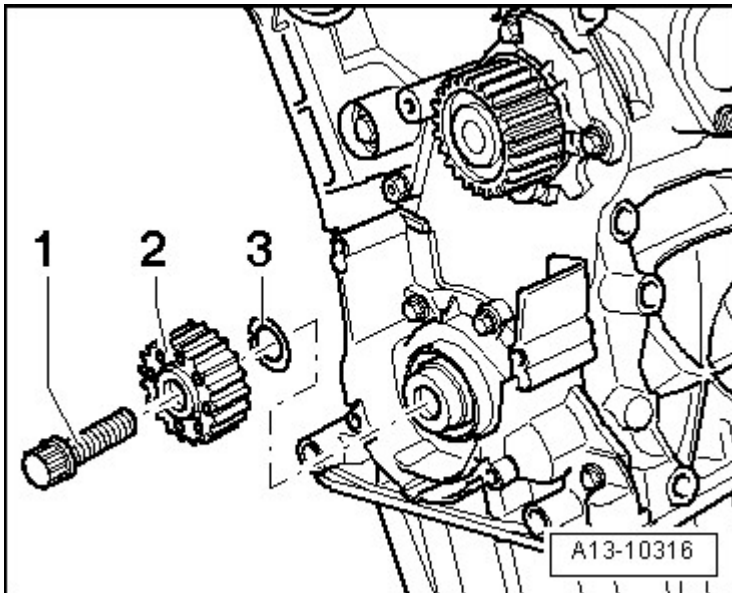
Identifying Center Bolt, Crankshaft Toothed Belt Gear & Diamond Disc
